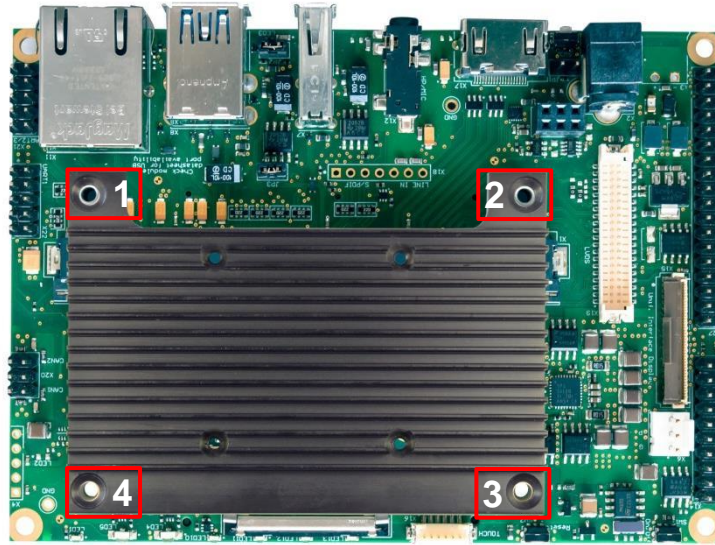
Align Apalis Heatsink screw holes with the fasteners
